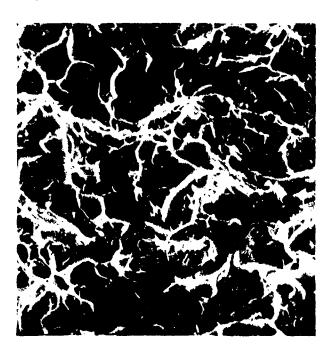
Failure of an A-514 weld Charpy specimen tested at -196 $^{\rm O}$ C by cleavage, 4000x.
